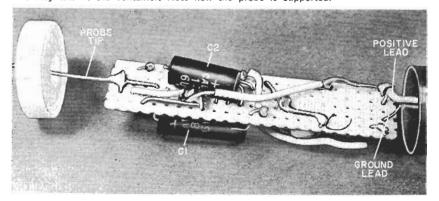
The parts fit the small board easily if you follow the layout shown here. Make sure you have a small hole in the container to make screwdriver adjustments of R3 as required during operation.
